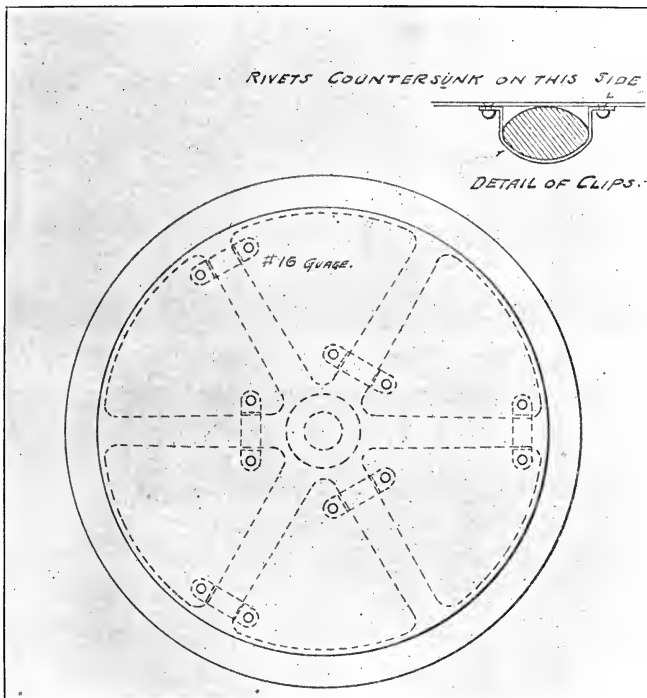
Illustration No. 21. Reproduction of blue print drawing made by this department. Drawing shows method of attaching disc to flywheel.
